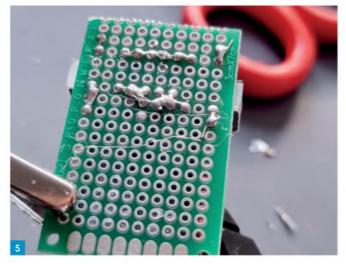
The parts needed for the project. Fig. 2: Open up the soundcard PCB. Fig. 3: The transformers in place on the board. Fig. 4: Identifying the solder points on the soundcard. Fig. 5: Underside of board. Fig. 6: Connections on top of board. Fig. 7: Attaching the wires for the speaker. Fig. 8: Pin connections for the min-DIN. Fig. 9: The three connections as described in the text. Fig. 10: The completed project.
